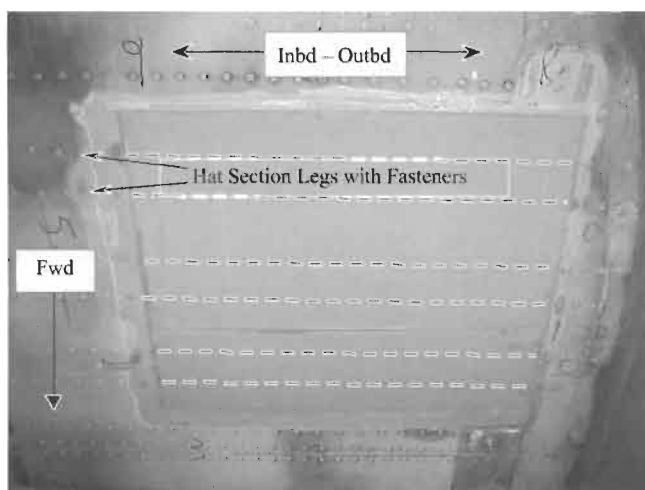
An installed bonded repair doubler used to repair corrosion in the C-130 wing.
